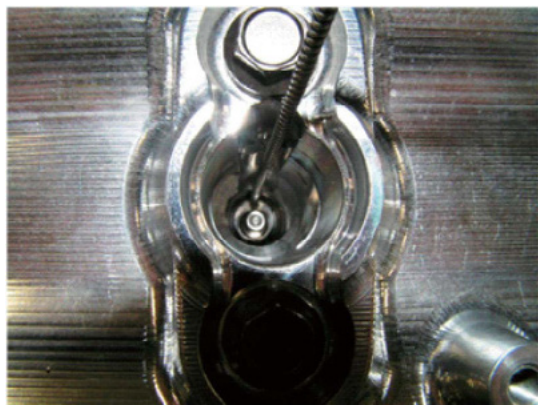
Photograph of plug hole in which plug with sensor was attached
